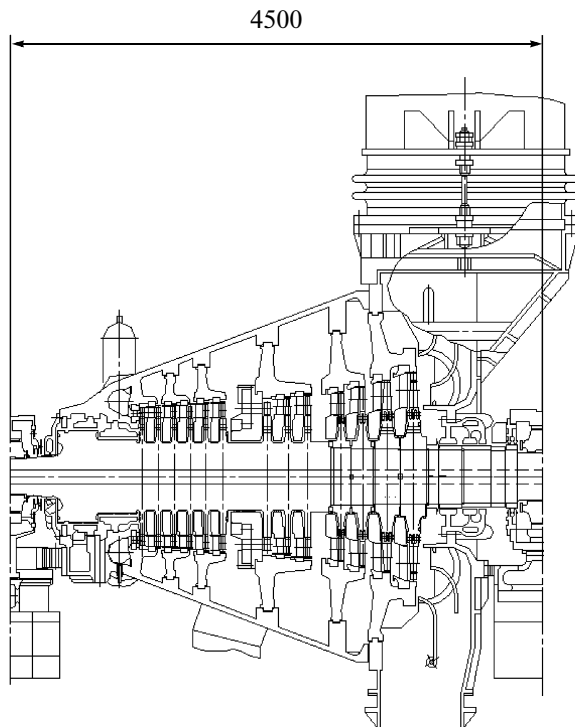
The IPC of the PT-100/130-12.8/1.0 steam turbine.
